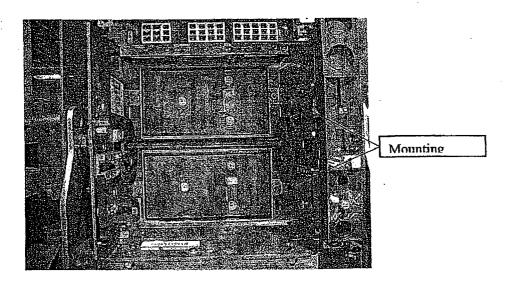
Location of Primary Disconnect Back Panel Mounting Bolts (qty=4)
